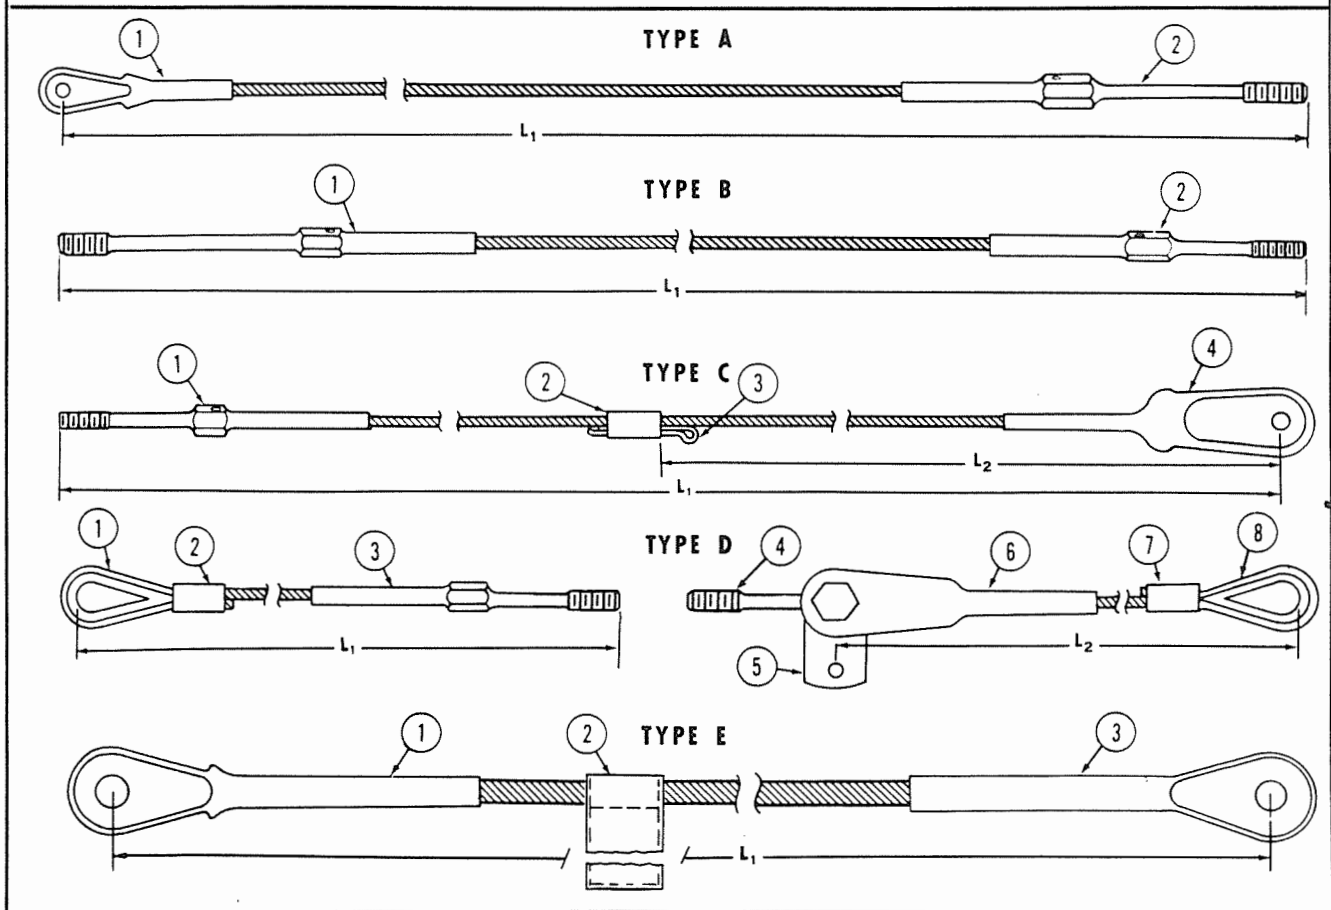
(Sheet 9 of 9 Sheets). Tail Gear Locking Control System — Cable Chart and Cable Assemblies
